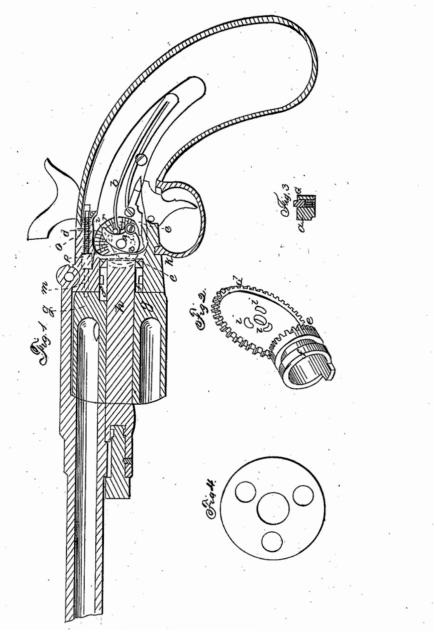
Wesson's 1849 Patent bevel gear drawing. Patent #6,669. Note detail of bevel gear in Figure 2 of patent drawing.
